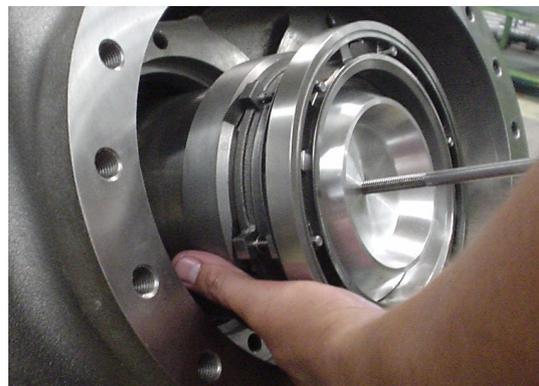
Attachment of the Cylinder ASSY in the Crankcase
